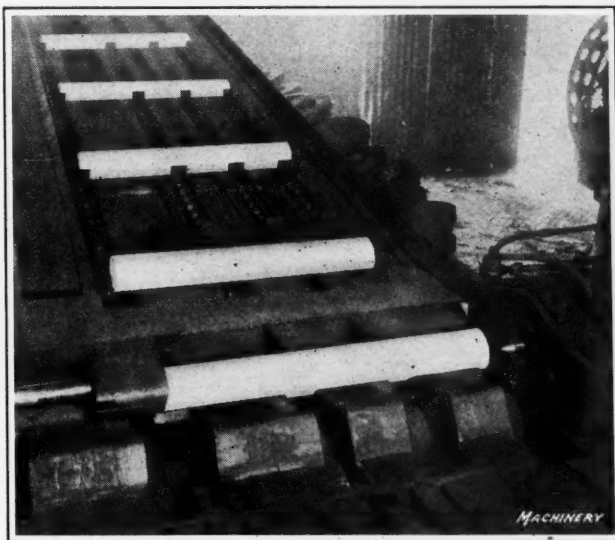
Pneumatic Centering Machine for centering One End of the Hot Billet preparatory to the Piercing Operation
